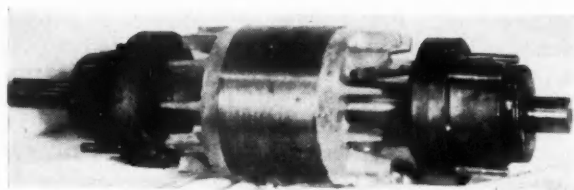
Aluminum rotor with rotor bars, end rings and blower vanes pressure cast in one solid unit. Shown complete with self-contained cartridge type bearing housings. Dust-tight and grease-tight
